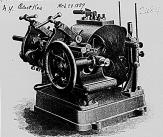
THANSPORMER OR WELDING COIL OF THE THOMSON ELECTRIC WELDING CO.
